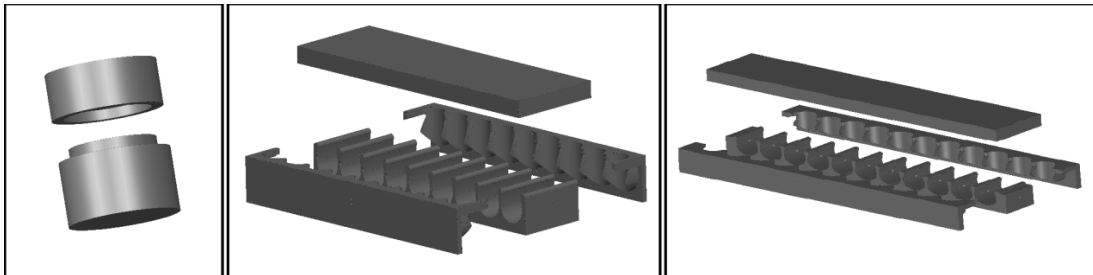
Explode views of mold assemblies for spherical actuator (left), cuboid actuator (middle) and finger actuator (right).
